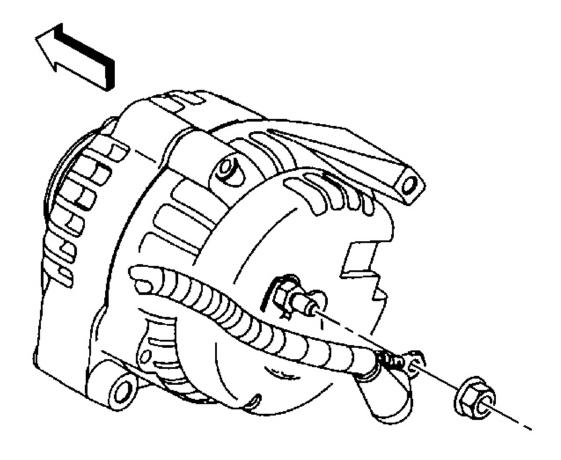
View Of Generator Cable & Nut Courtesy of GENERAL MOTORS CORP.
